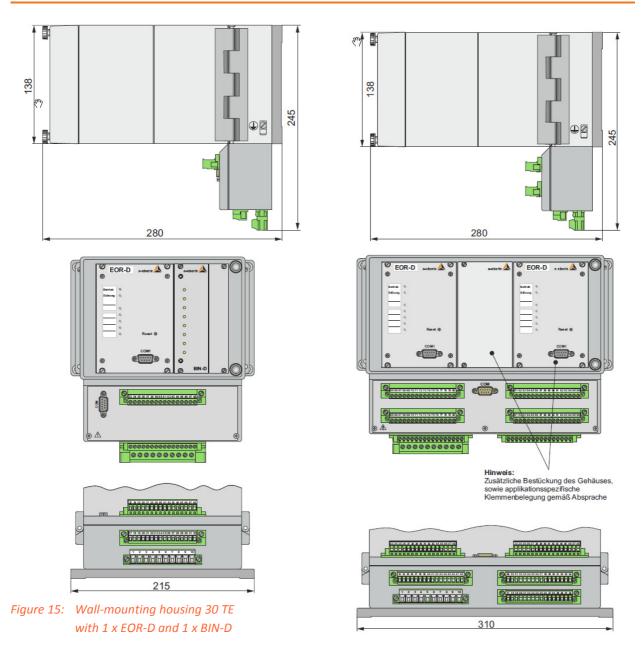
Wall-mounting housing 49 TE with 2 x EOR-D
